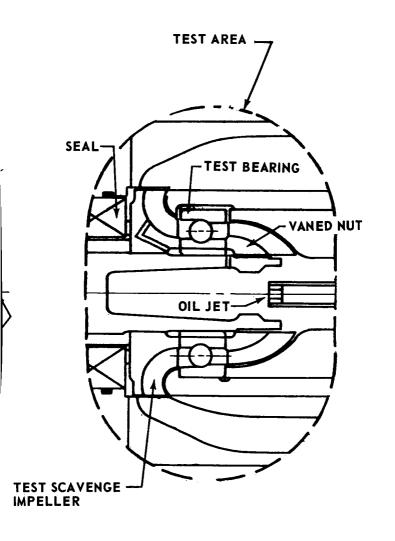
Turbine-Compressor Bearing-Scavenge Rig
